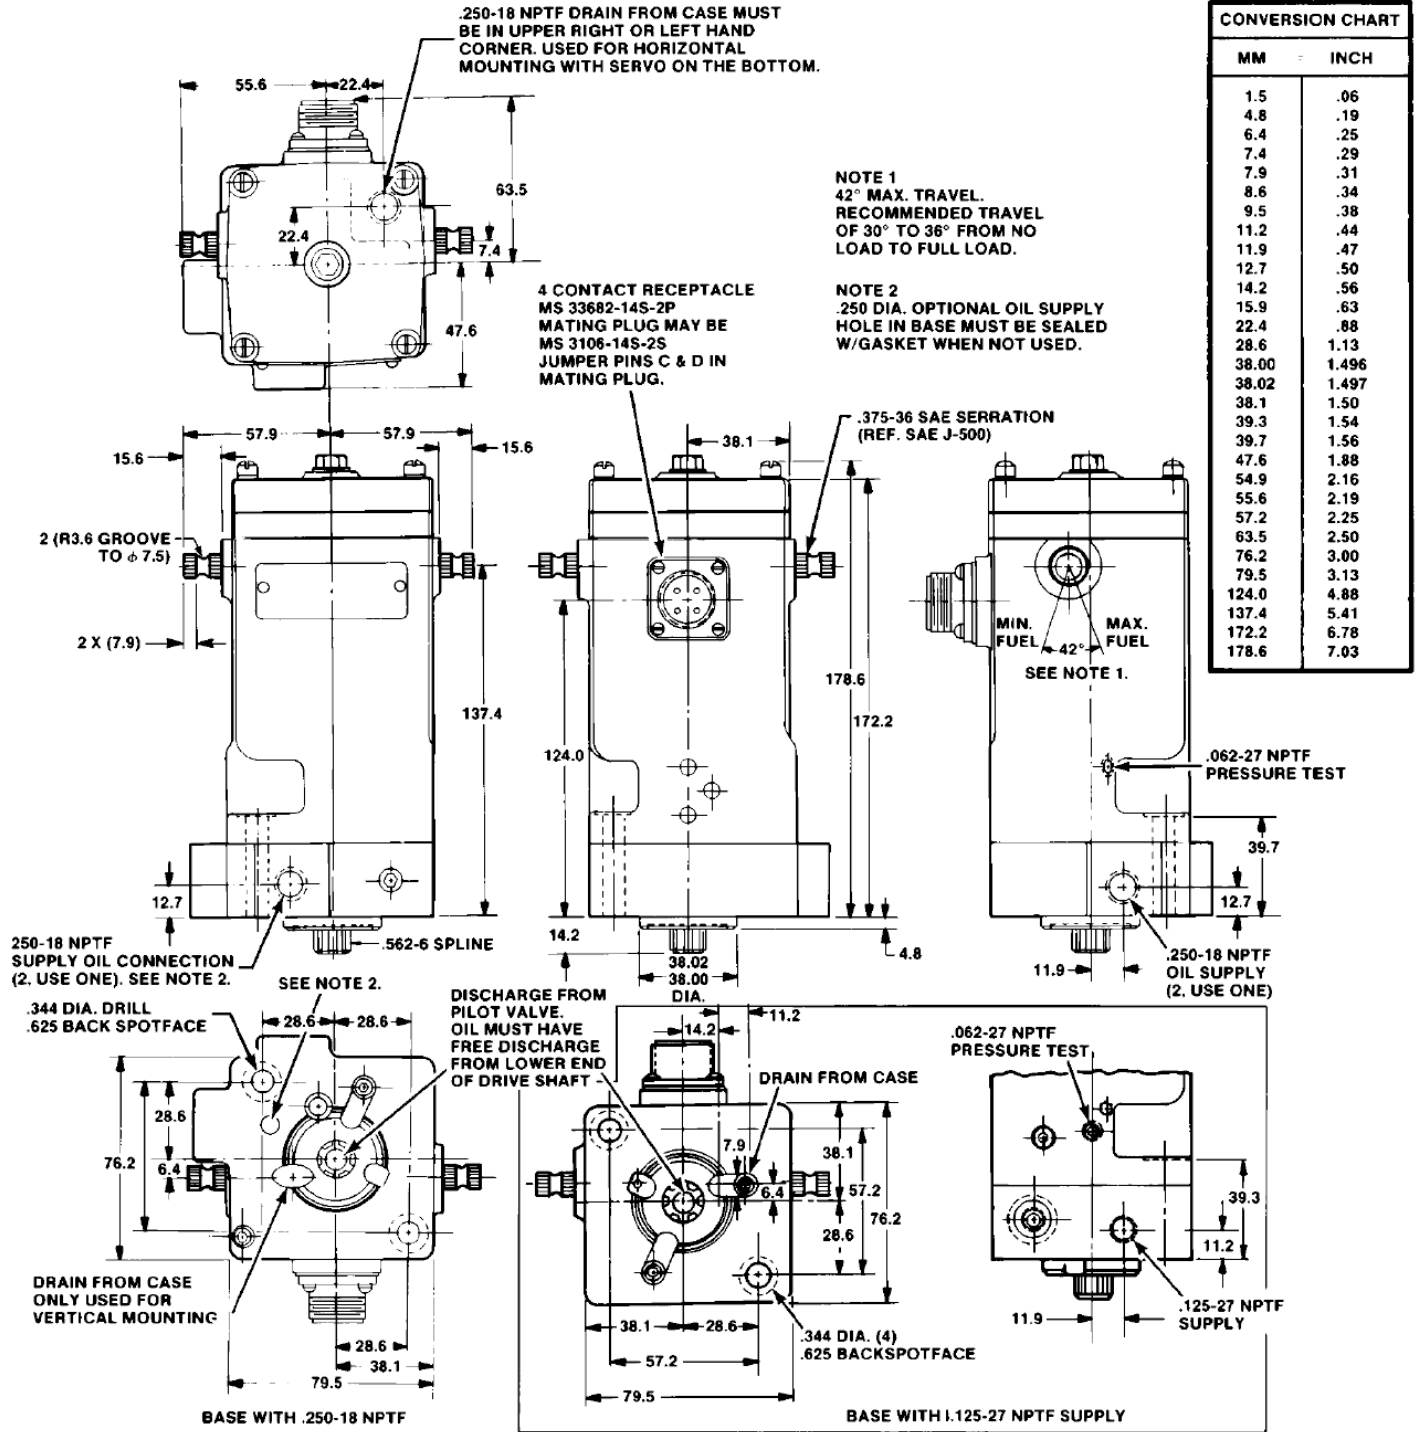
Outline Drawing (EG-3P with Oil Pump)
